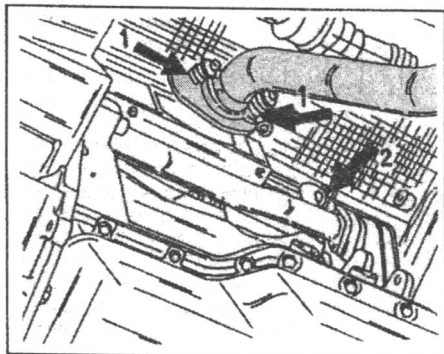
Attachment of the exhaust pipe-to-manifold connection (1) and the water hose-to-water pipe connection (2).
